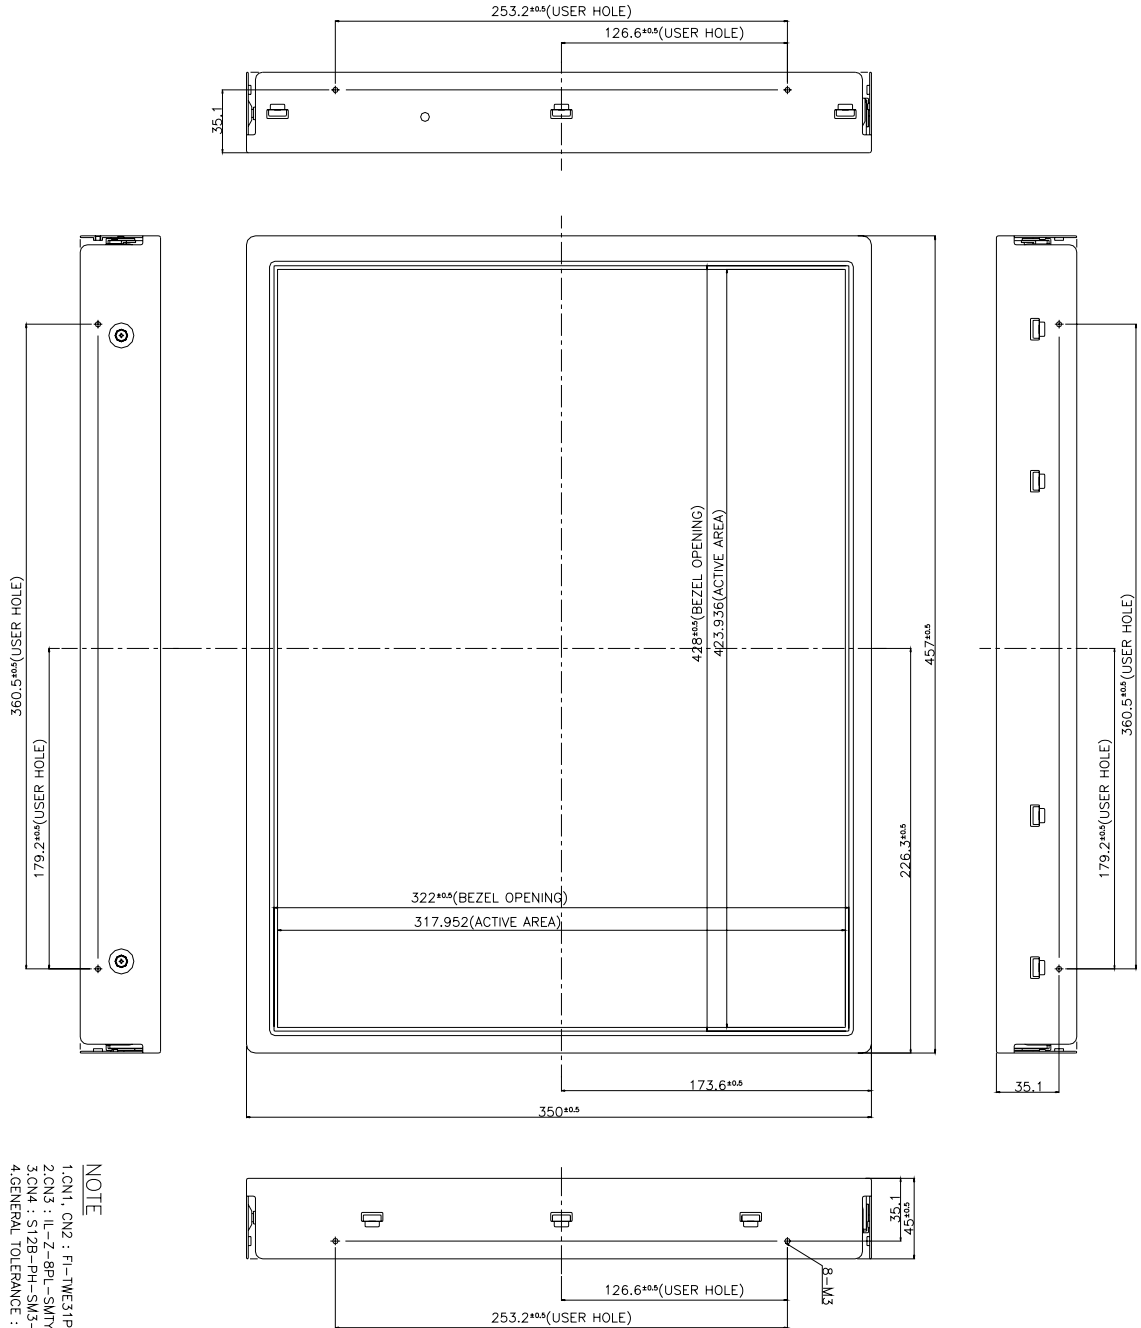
TFT-LCD Module Outline Dimensions (Back view)
